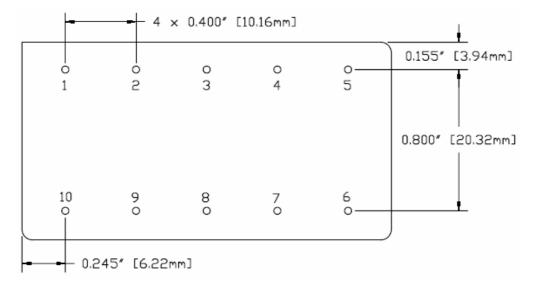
Non-Flanged, Solder Seal Tin Plated Package and Pinout (Not Used for /HB or Higher Screened Products) (Dimensional Limits are ±0.005" Unless Otherwise Stated)
